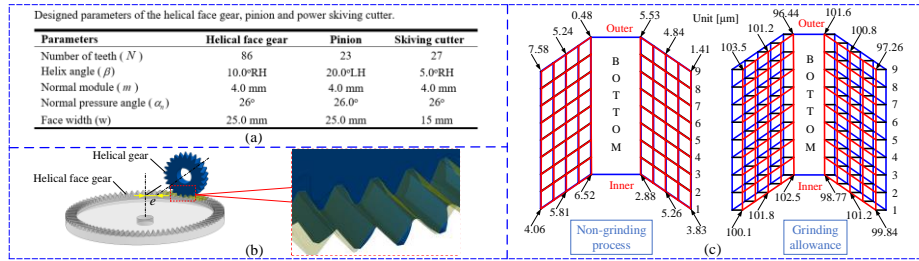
(a) design parameters; (b) skived helical face-gear assembled with its mating helical gear; (c) results of normal deviation with and without considering grinding allowance.
